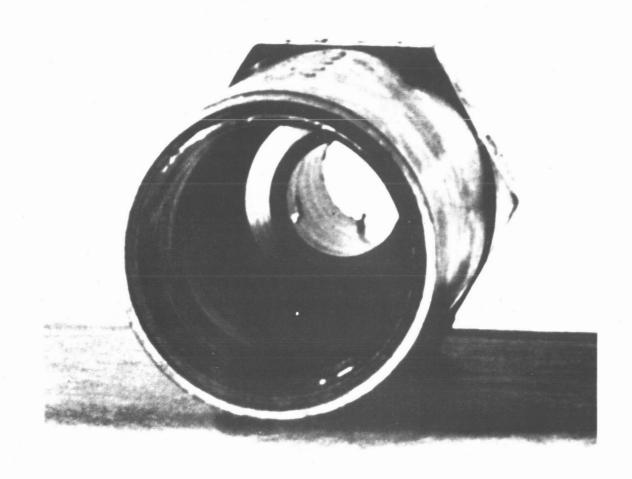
CHECK VALVE WITH METALLIC CHIP
